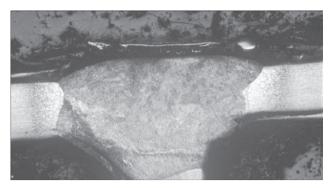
General appearance of welded T-joint after repair welding (×25)
